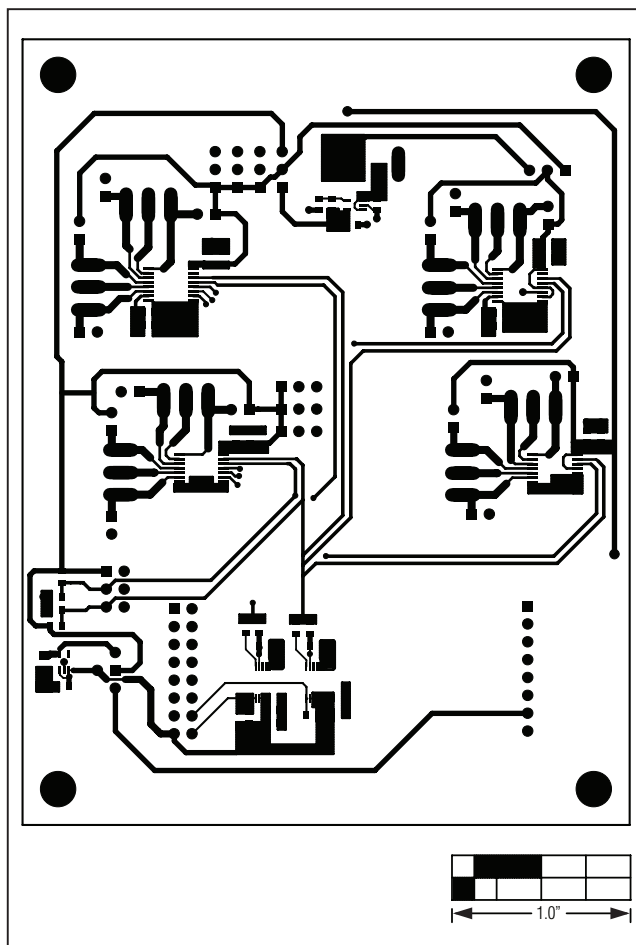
MAX5387 EV Kit PCB Layout—Component Side
